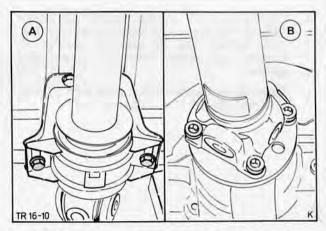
Driveshaft mountings – rear axle flange and centre bearing
